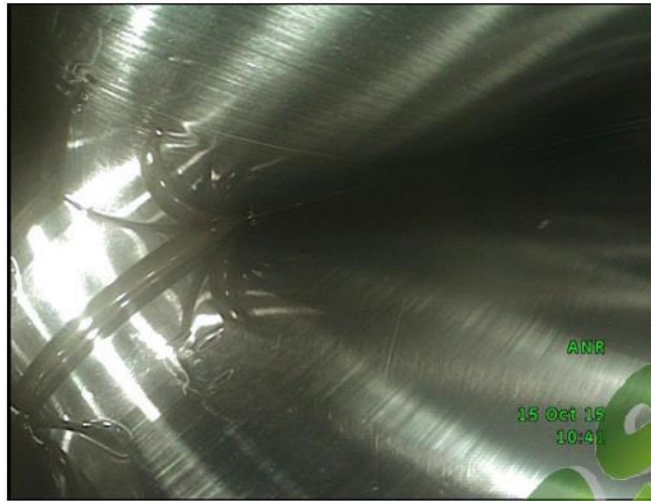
shows bearing position no. 9, the bearing of the intermediate shaft at generator side. The bearing shows no irregularities.
